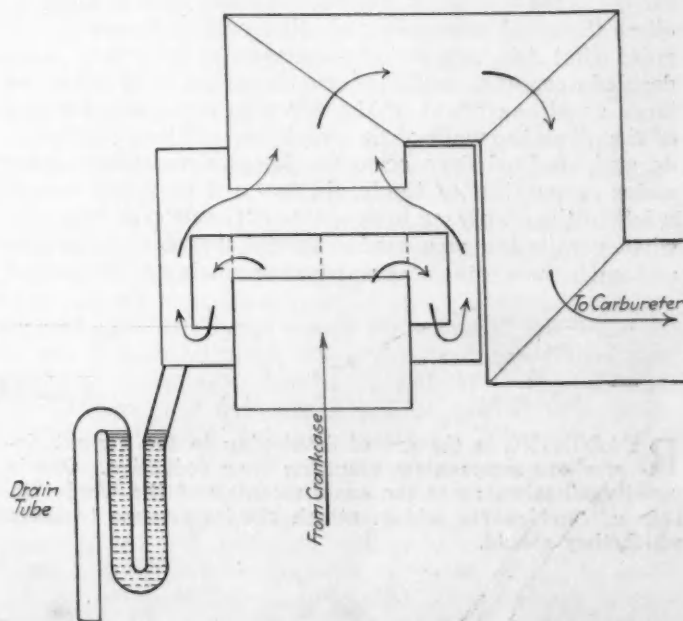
AN OIL-TRAP THAT SUCCESSFULLY CAUGHT THE LUBRICATING OIL THAT WAS FORMERLY CARRIED INTO THE COMBUSTION-CHAMBER IN SUSPENSION
